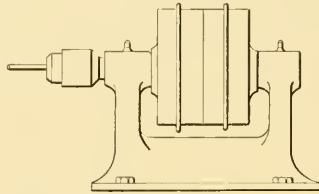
HORIZONTAL POWER TAPPING MACHINE
